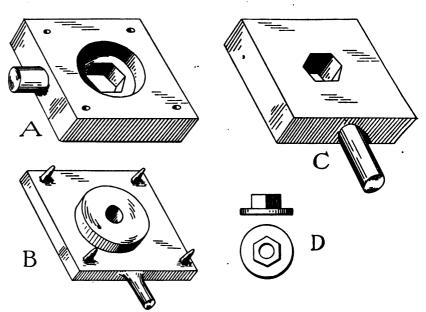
TOOLS FOR MAKING KNUCKLE JOINT PIN NUTS. D.—THE FINISHED NUT.
